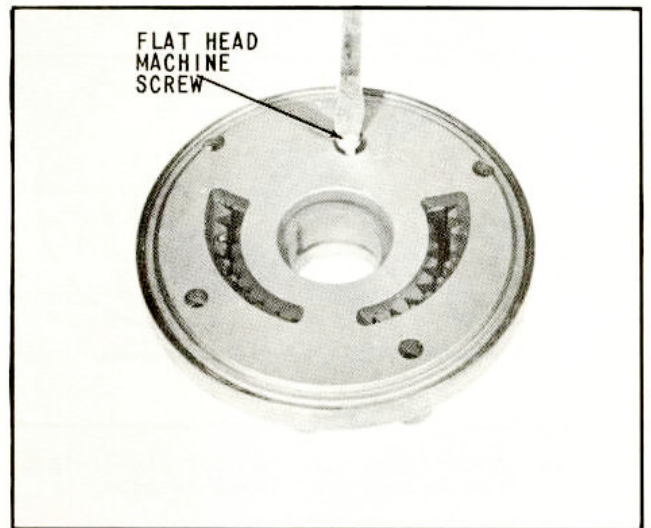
Installing Flat Head Machine Screw through Backing Plate
